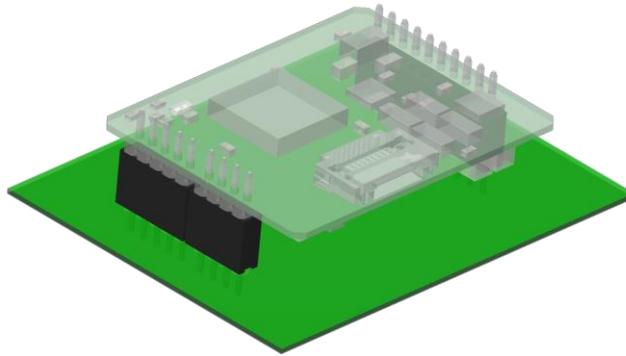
Disc Pump Drive PCB mounted on a PCB
